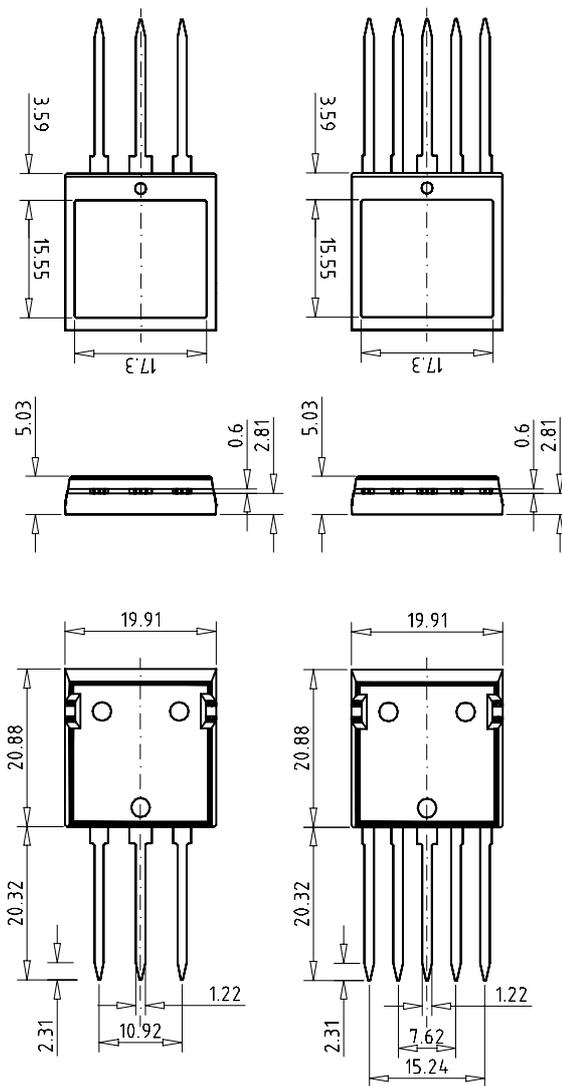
dimensional drawing of three pin (left) and five pin (right) version
